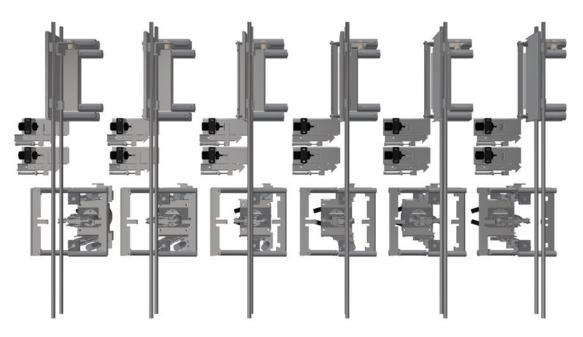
Intended configuration of multiple module installation to minimise floor space.
